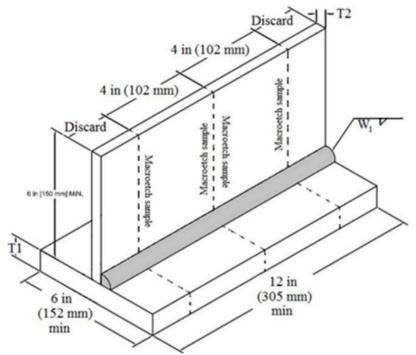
, Sketch that illustrates the weld joint type, and dimensions. The weld was completed in the 2F position. Procedure and Results Non-Destructive Testing
